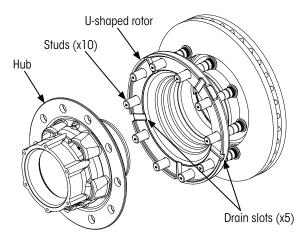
Hendrickson stud mounted hub & Inboard mounted U-shaped rotor assembly
